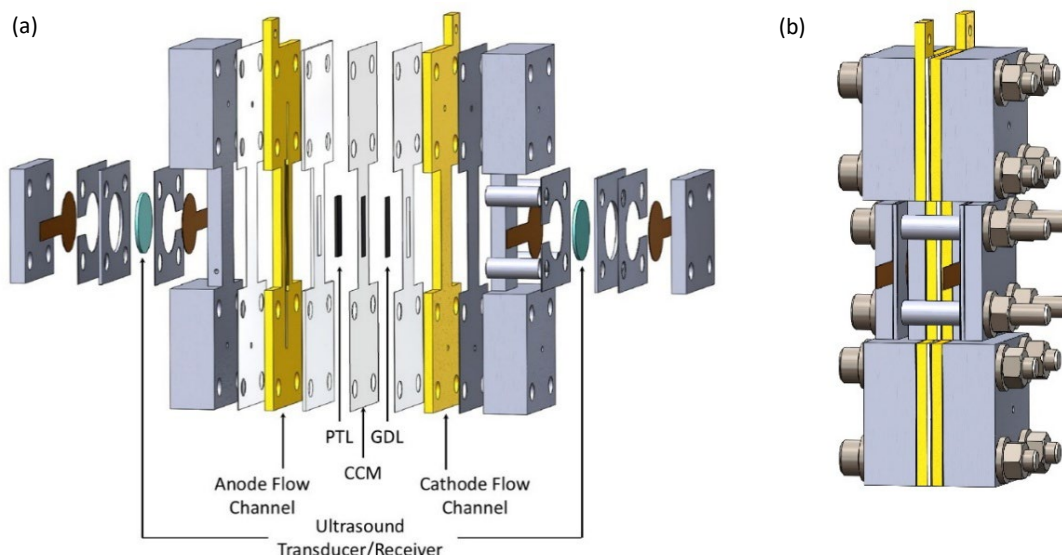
(a) Volume rendering and exploded view of the electrolysis cell. From the outer to the inner of the cell: piezo plate, ultrasound transducer/receiver pair with two copper sheets and positioning gaskets, end plate, flow field, PTL/GDL with gasket, and CCM. (b) Assembled electrolysis cell.
